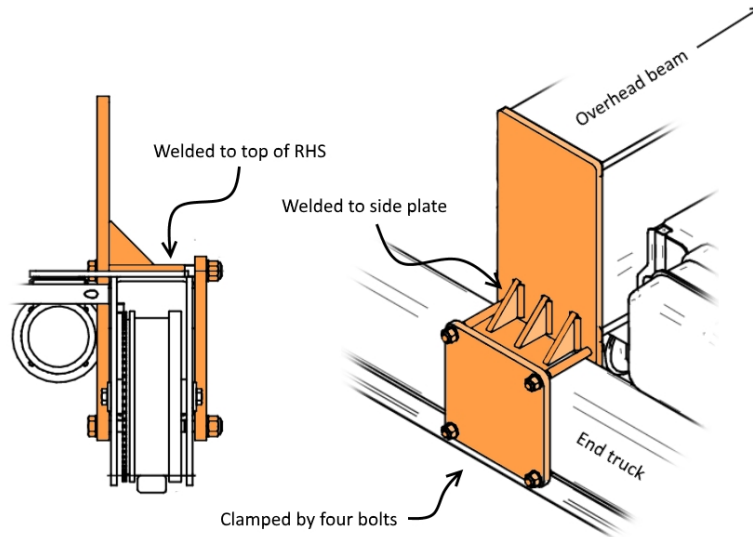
Front and isometric view of the connection between end truck and overhead beam.
